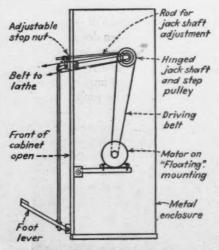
Sectional view of cabinet and drive showing foot lever connection to jack shaft. Belt tension is regulated by adjustable stop nut located on front of cabinet.
